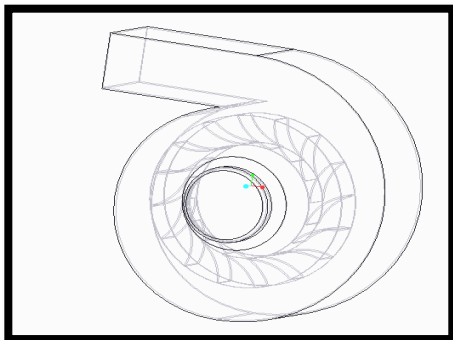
Wireframe view of assembly – centrifugal fan for 20 blades
